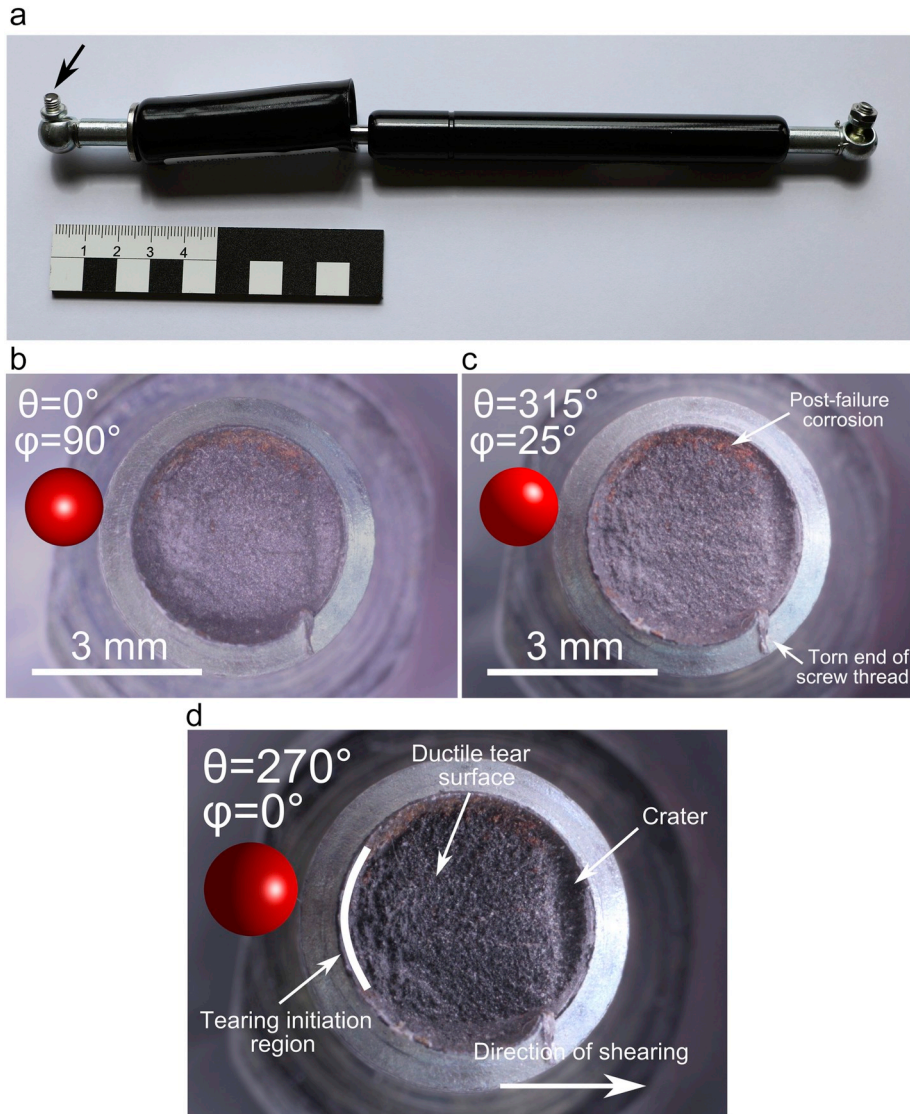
Gas spring ball joint sheared at a threaded connection. a.) Location of the fracture surface on the gas spring assembly. b.) Fracture surface under a poor illumination condition (12-o'clock position, as with a ring light), showing only basic features. c.) Improved view with lighting from the top-right. d.) Fracture surface under strongly-raked lighting, emphasising surface relief.
